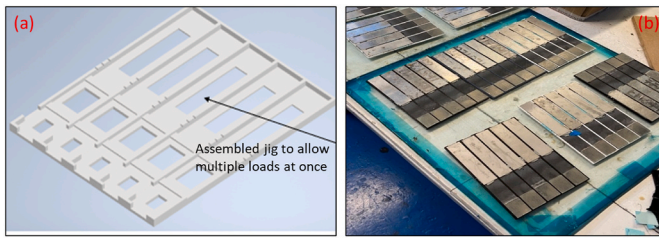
(a) 3D-printed jig for single-lap joining; (b) cured samples.
